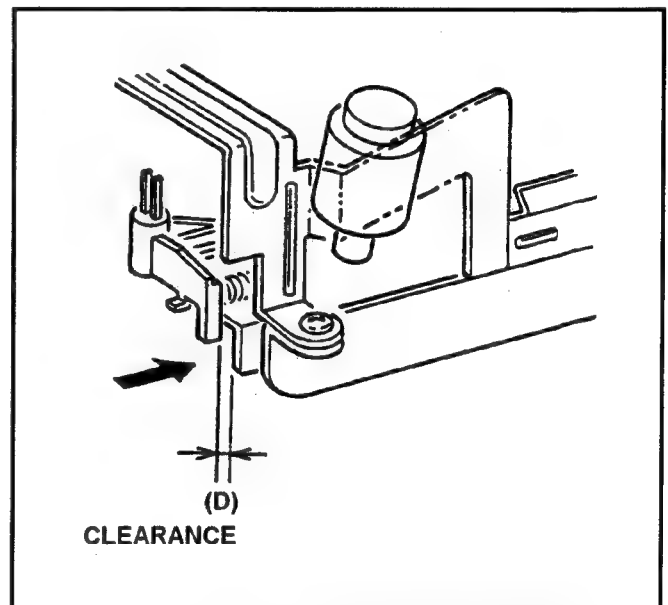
Cleaner Solenoid Position Adjustment
